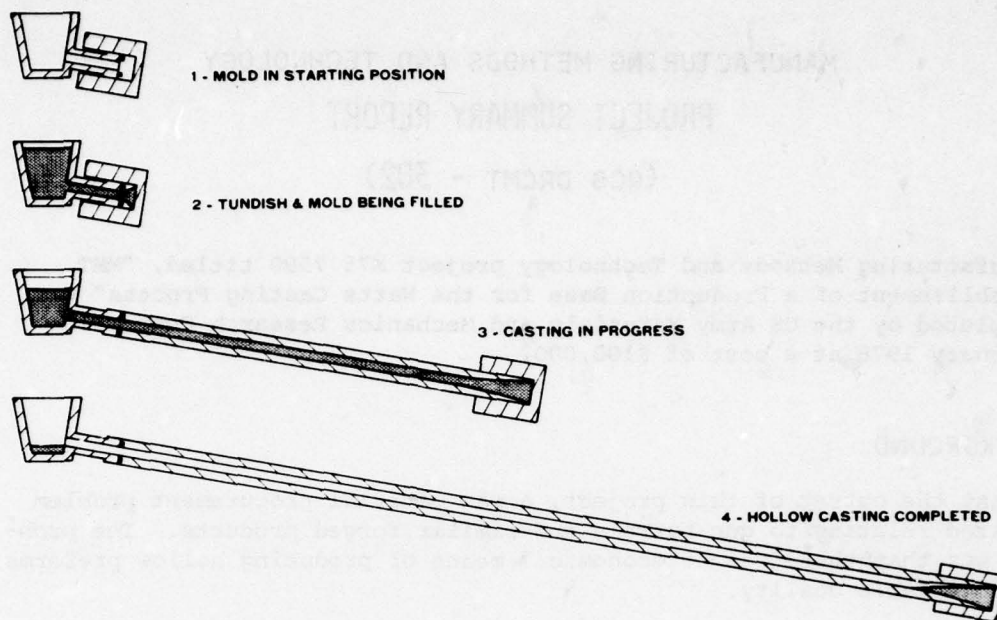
Operating Sequence of Horizontal Tube Blank Caster
